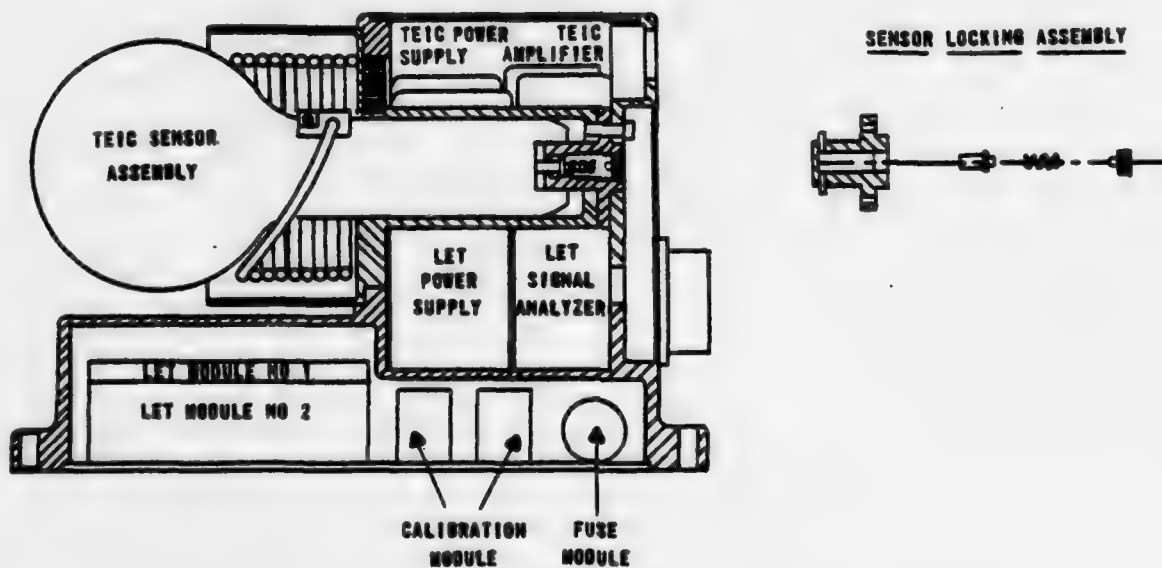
Active Dosimeter Module Mounting Sensor-Locking Assembly (Side View)
